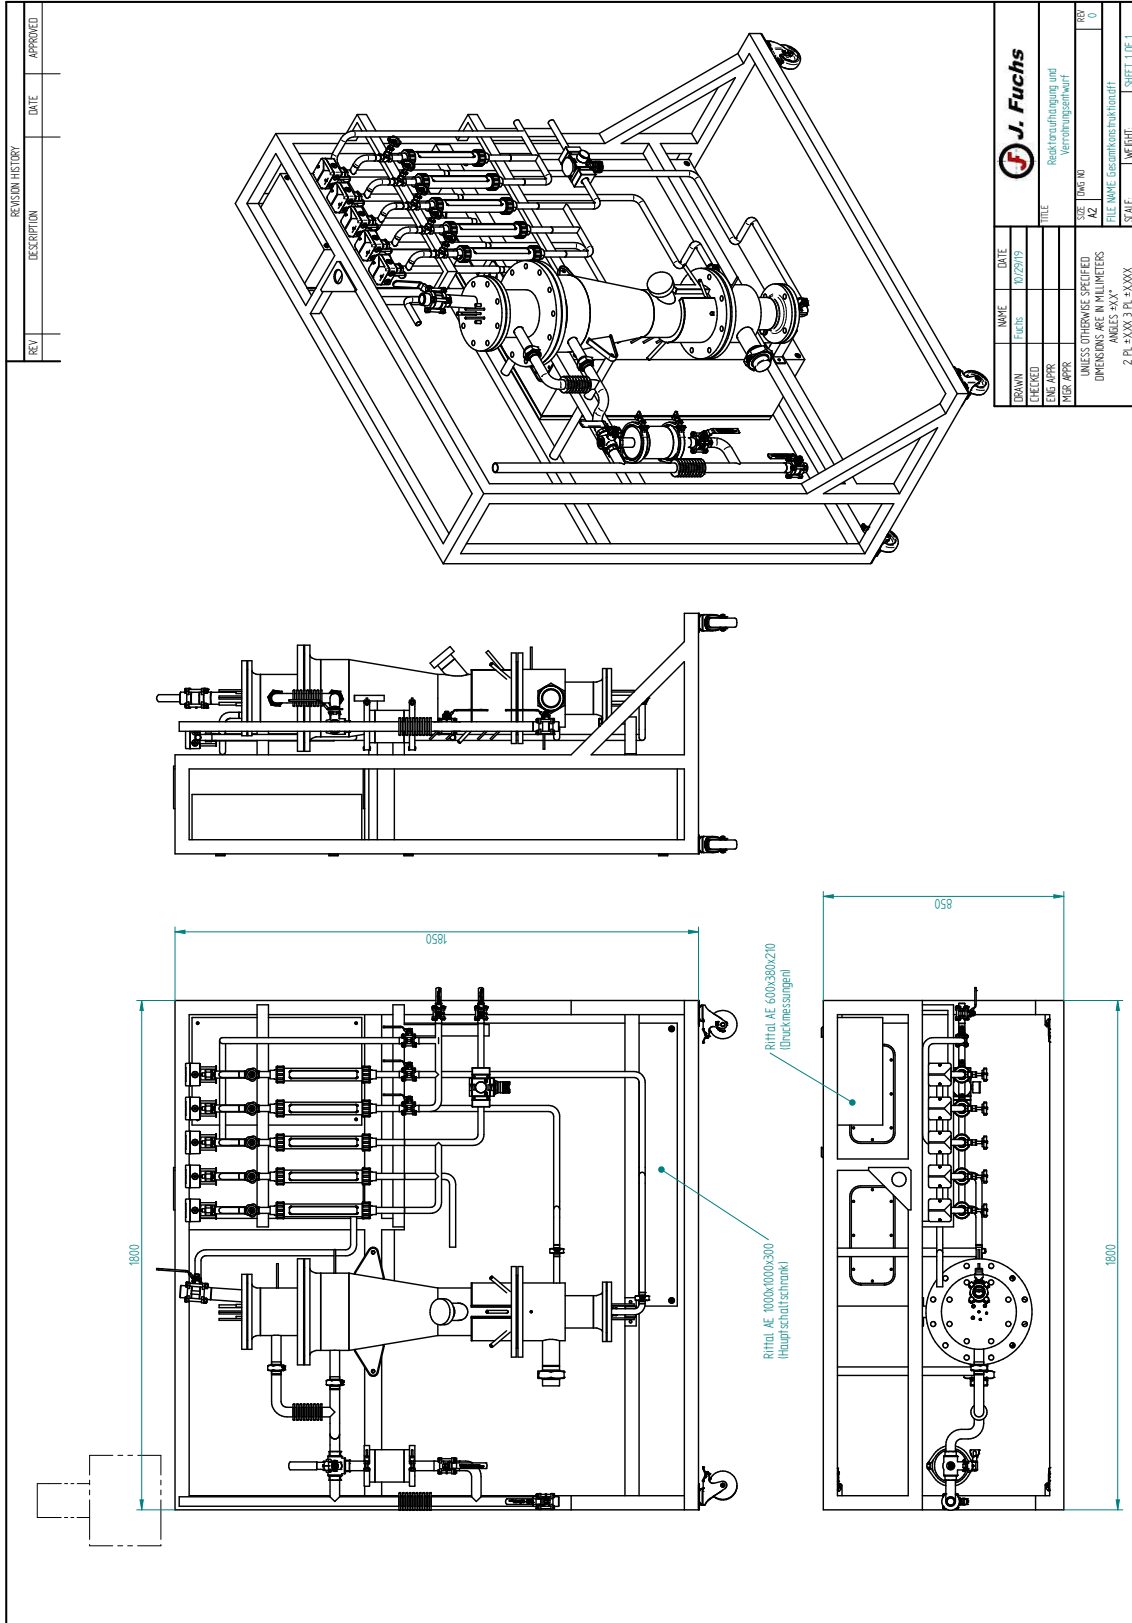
Drawing of the whole assembly including the fluidized bed methanation reactor and the mounting and auxiliary systems
